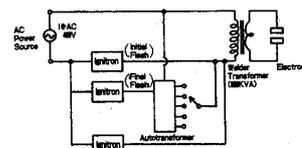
Improved Electric Circuit of F. B. Welder
